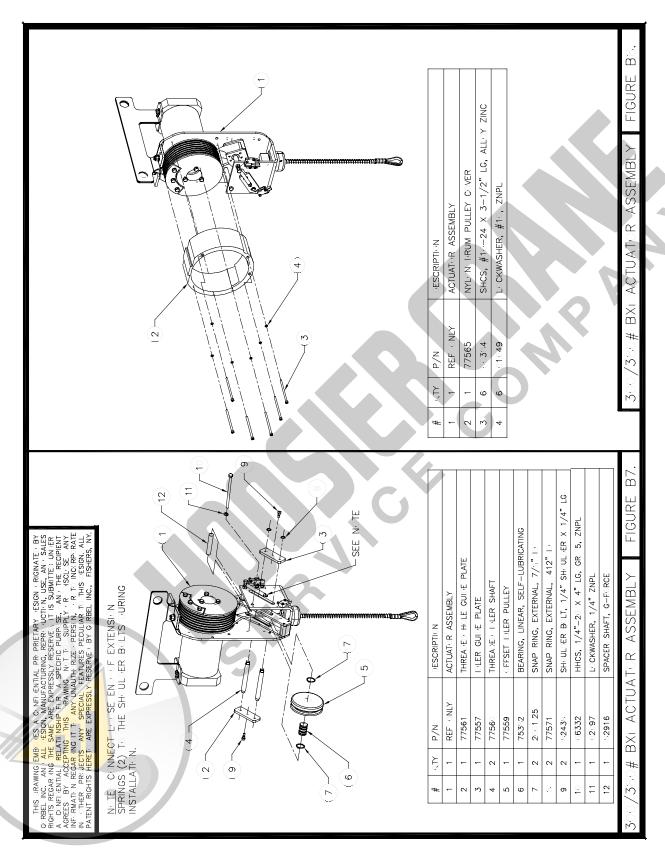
(bottom) & Figure B8 (top). 300/380# BXi Actuator Assembly.
